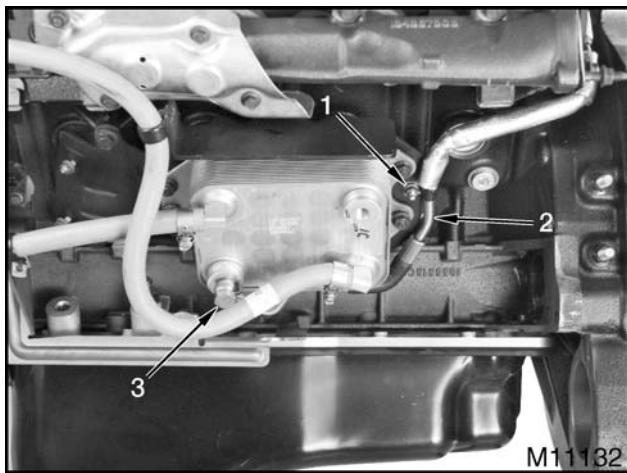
High-pressure pump to cooler tube assembly — lower connection
